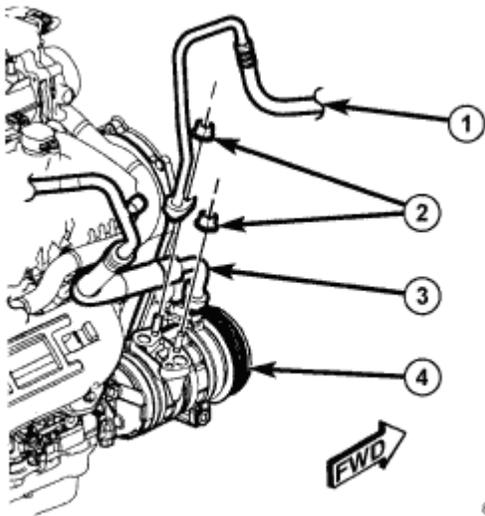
A/C Clutch Field Coil Connector, Bolts & A/C Compressor
